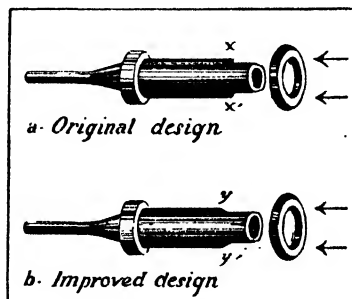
Landing-gear parts were assembled more easily after this minor design change. (Suggested by Mr. Hugh H. Boyes and Mr. Ray A. Wilson, Jr.)
